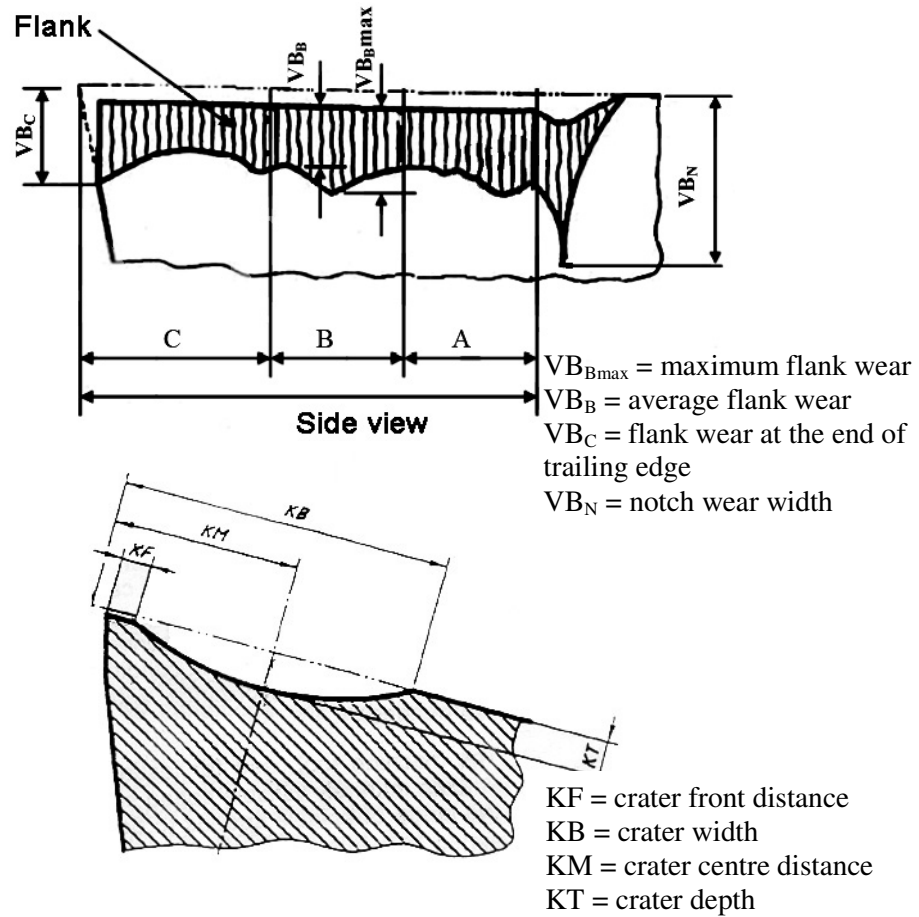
Measurement of flank and crater wear on turning cutting tools (adapted from<sup>52</sup>).
